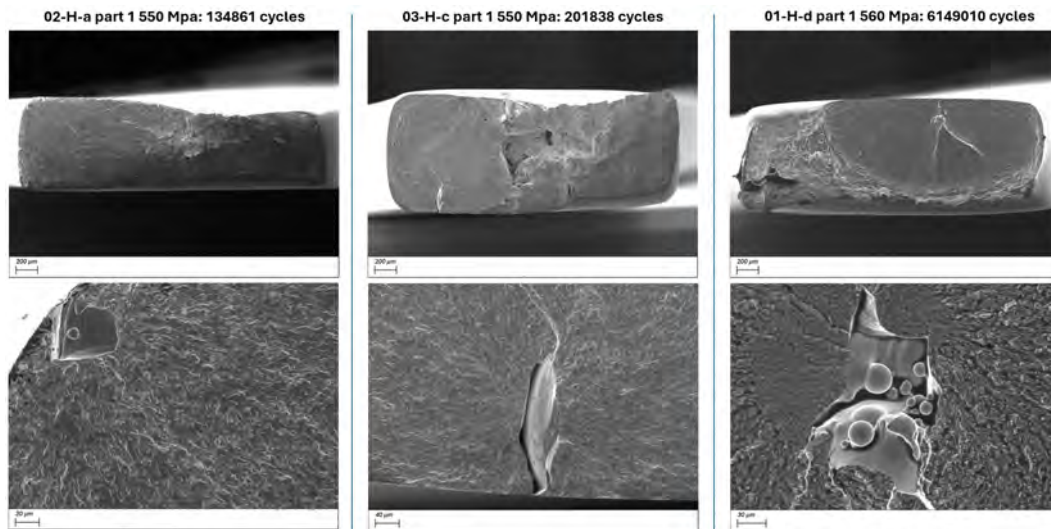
SEM fracture surfaces of horizontally built PBF-LB/M UNS S32760 HCF specimens. The figure reports representative fracture surfaces of specimen 02-H-a, tested at 550 MPa and failed after 134861 cycles; specimen 03-H-c, tested at 550 MPa and failed after 201838 cycles; and specimen 01-H-d, tested at 560 MPa and failed after 6149010 cycles. The images show the overall fracture morphology and higher-magnification details of defect-related regions, highlighting the role of lack-of-fusion defects and local discontinuities in fatigue crack initiation. In particular, the comparison indicates that the fatigue life is not governed only by the size and extension of the critical defect, but also by its location with respect to the specimen surface. For specimens 02-H-a and 03-H-c, the defect-related crack initiation regions are located at or very close to the surface, favouring premature failure after a relatively low number of cycles. Conversely, in specimen 01-H-d, the critical defect is located within the internal volume of the specimen, leading to a delayed failure despite a comparable applied stress level. This evidence confirms the strong influence of both defect size and defect position on the fatigue response of horizontally built specimens.
